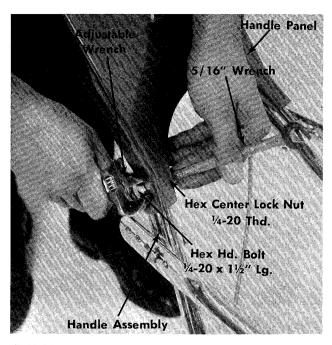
HANDLE PANEL ASSEMBLY TO HANDLE
